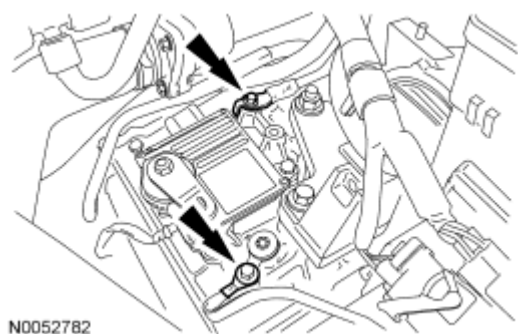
Identifying Transmission Control Module Electrical Connector
